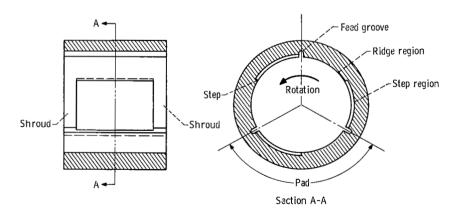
One-segment, three-pad shrouded Rayleigh step journal bearing.
